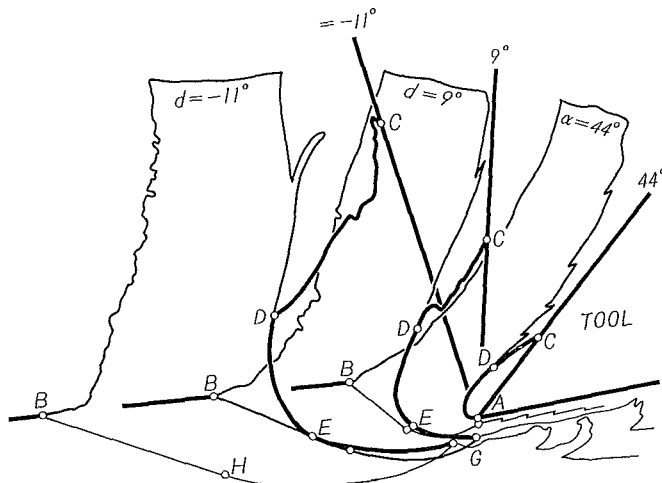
Variation of built-up edge and cutting geometries by change in tool rake angle α . Depth of cut $t_1=0.3$ mm, cutting speed $v=17$ mpm, 5% Co type high speed steel tool.
